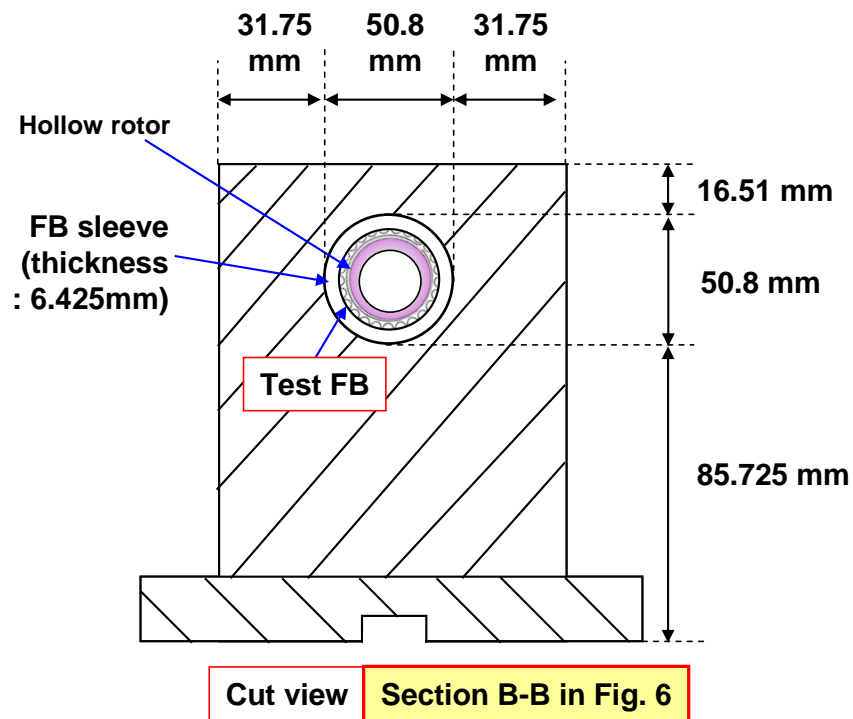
Cut view (not to scale) of section B-B in Fig. 6 of bearing support housing with dimensions of wall thickness around test bearing. Material of bearing support housing and bearing sleeve: AISI 4140.
